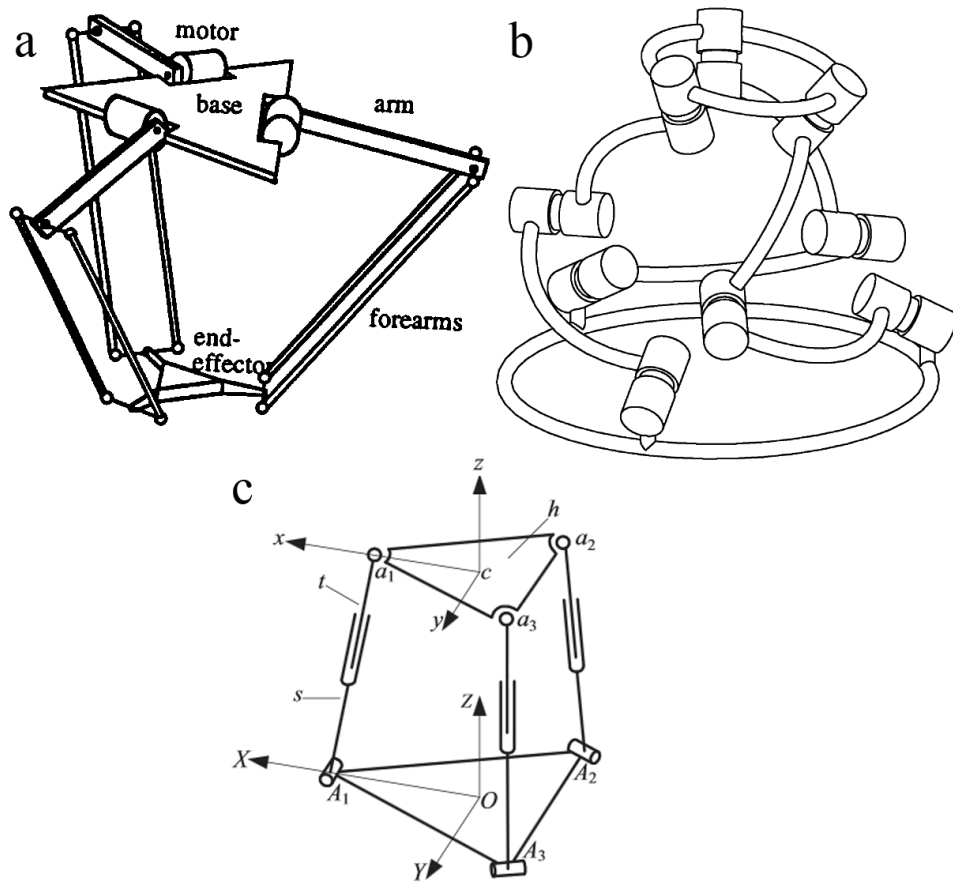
a) Delta Robot [2.6]; b) Spherical parallel Mechanism [2.7]; c) 3-RPS robot [2.8].
